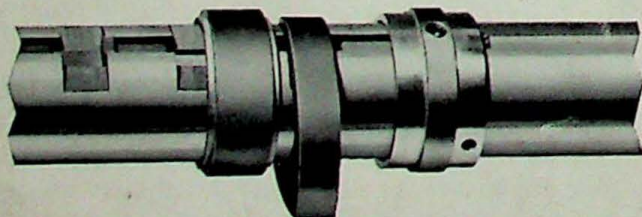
Cam slips easily into place on shaft with slots in alignment with offset key ways.
